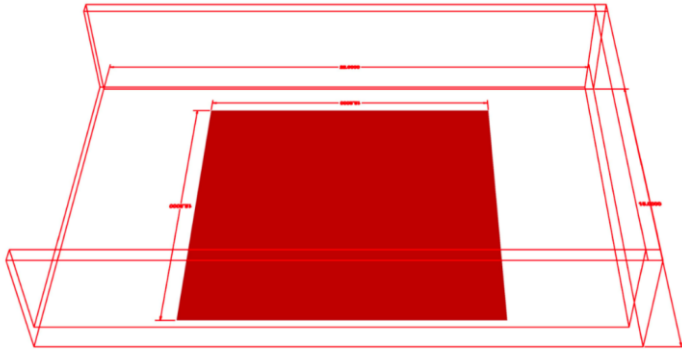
CAD drawing of heating element. Design by Angel Ortiz.
